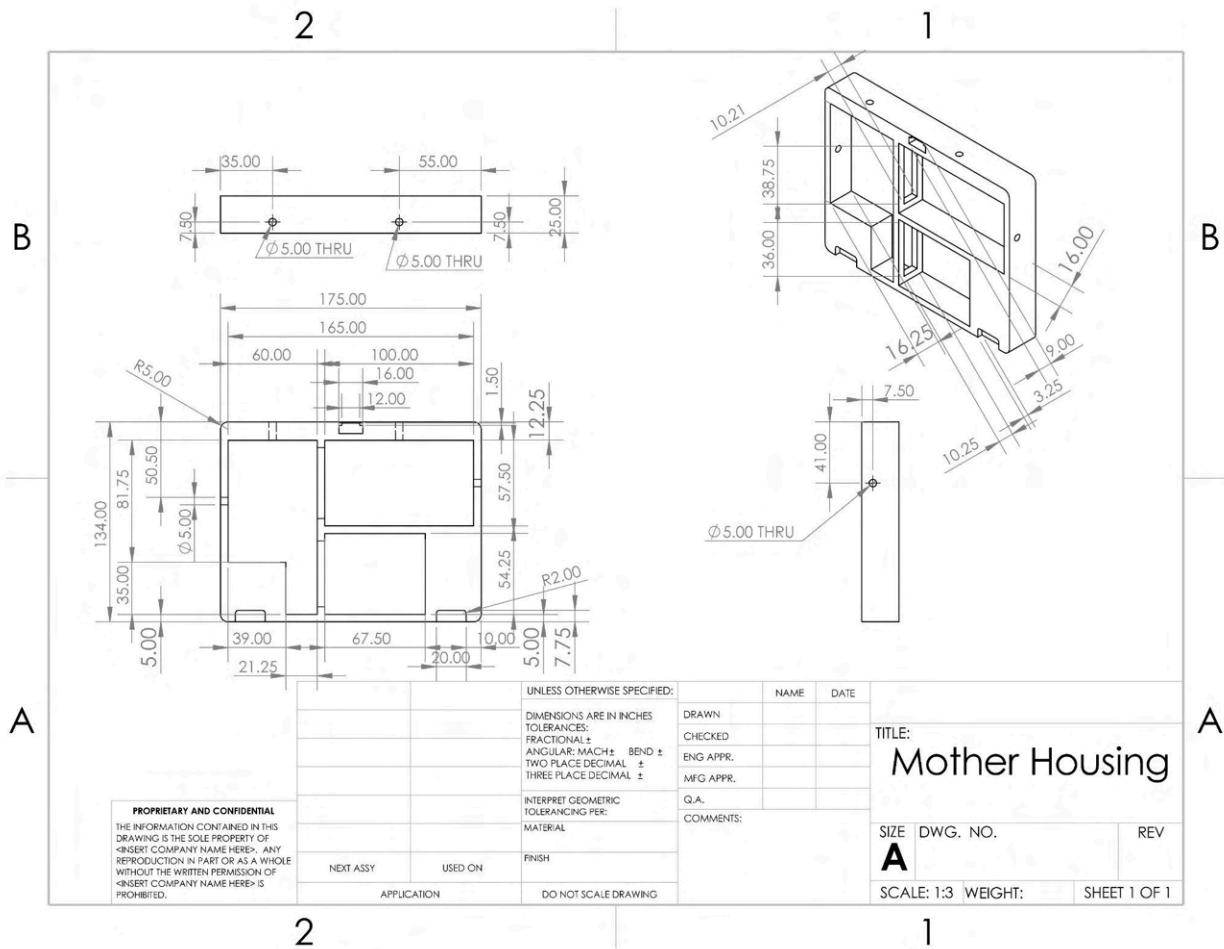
Mother Housing. The dimensions are in mm, not inches. (added dimensions)
